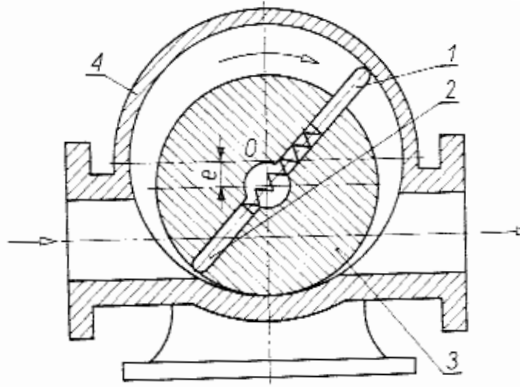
Rotary vane flow meter, where: 1 – blades, 2 – rotor, 3 – housing [1]
